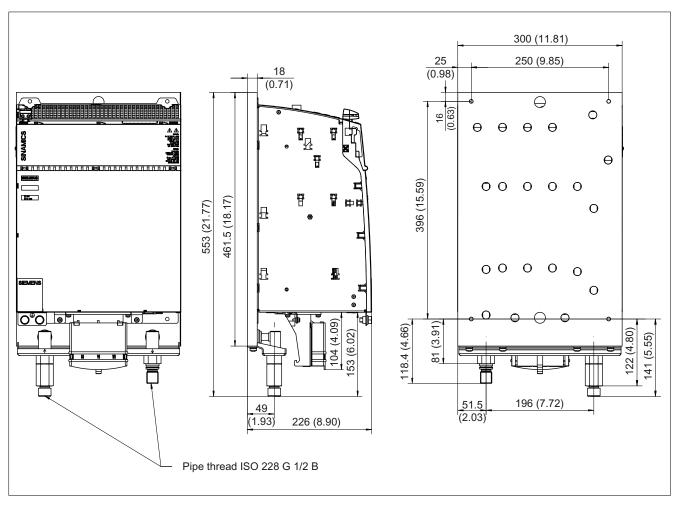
Dimension drawing of Active Line Module Liquid Cooled 120 kW, all dimensions in mm and (inches)
